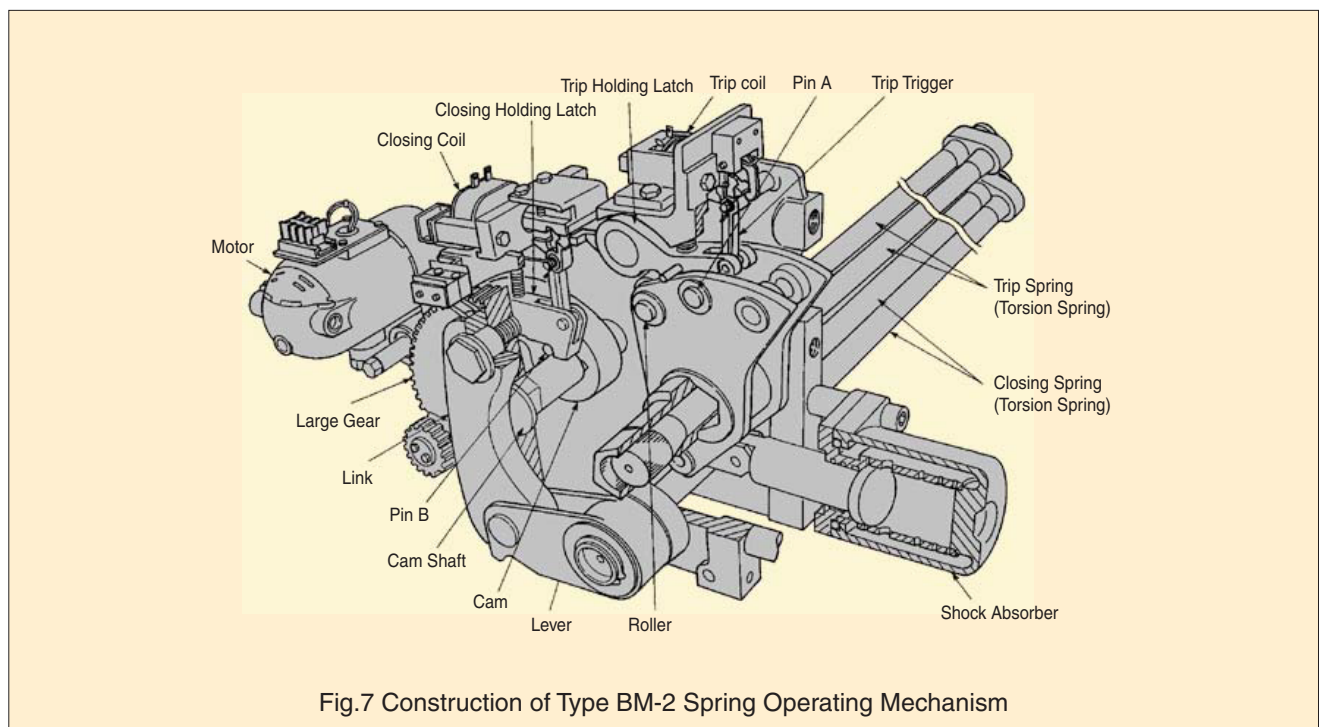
Construction of Type BM-2 Spring Operating Mechanism
